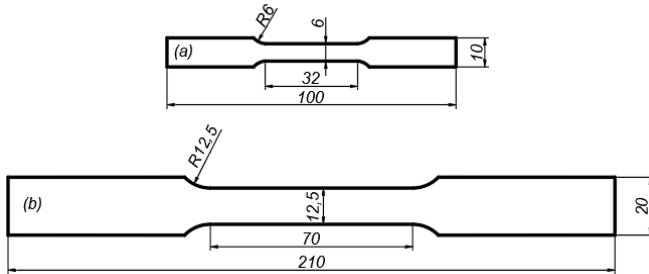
ASTM E8 sheet type tensile specimens (a) Subsize specimen (b) Standard specimen
